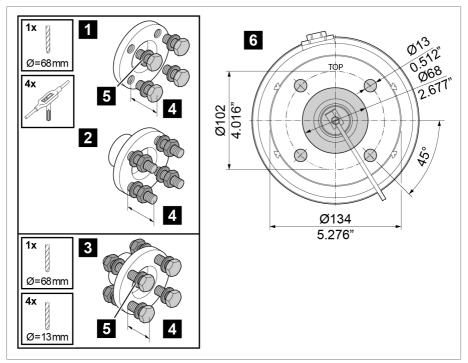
Connecting flange with holes for accommodating the MTO standard flange
